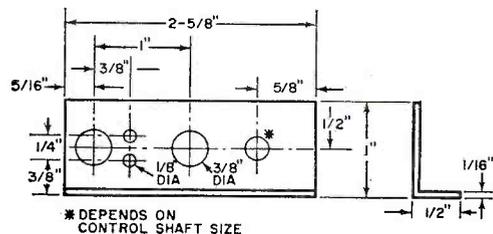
Mounting bracket is made from 1/16"-thick aluminum plate cut to dimensions given. It acts as a heat sink for SCR1 and as a support for R3.
